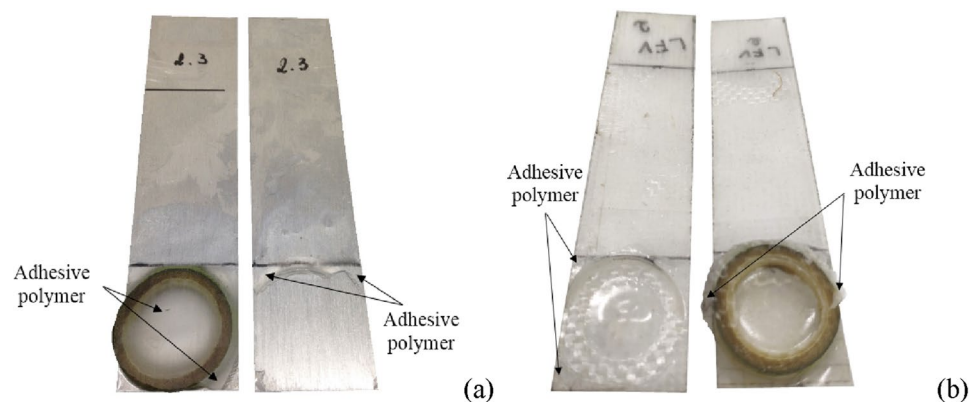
Fractured specimens of a Aluminium and b GFRP in the adhesion test II
